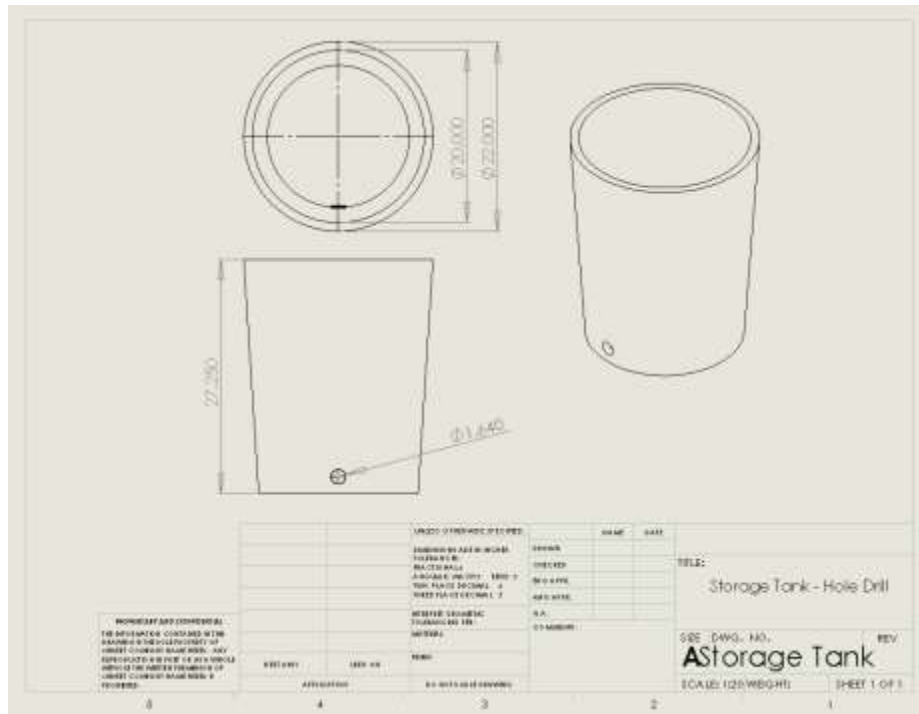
Storage tank engineering drawing (all of the dimensions are manufacture in +/- 0.05 tolerances -not shown in the drawing-)
